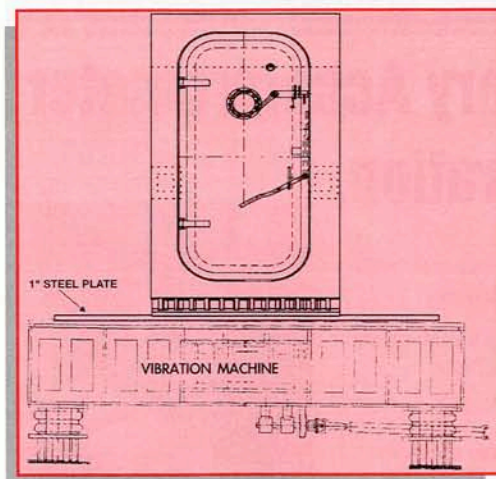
Front view of a ship's hatch door, mounted in its vibration fixture.
